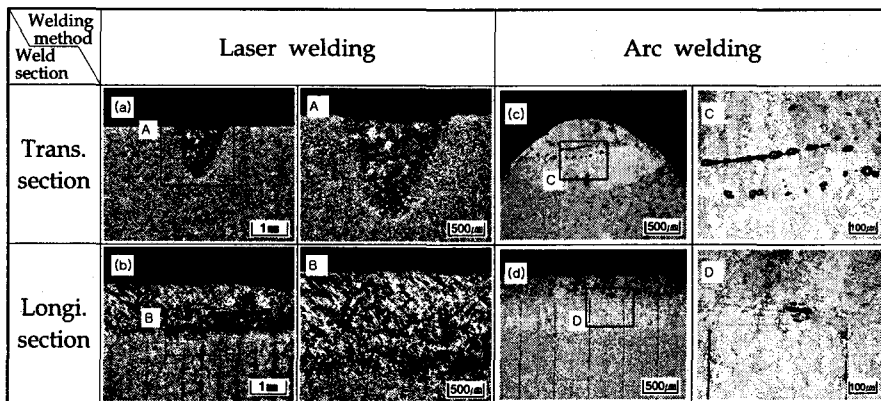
Appearance and defects of weldment by pulse laser and arc heat source
